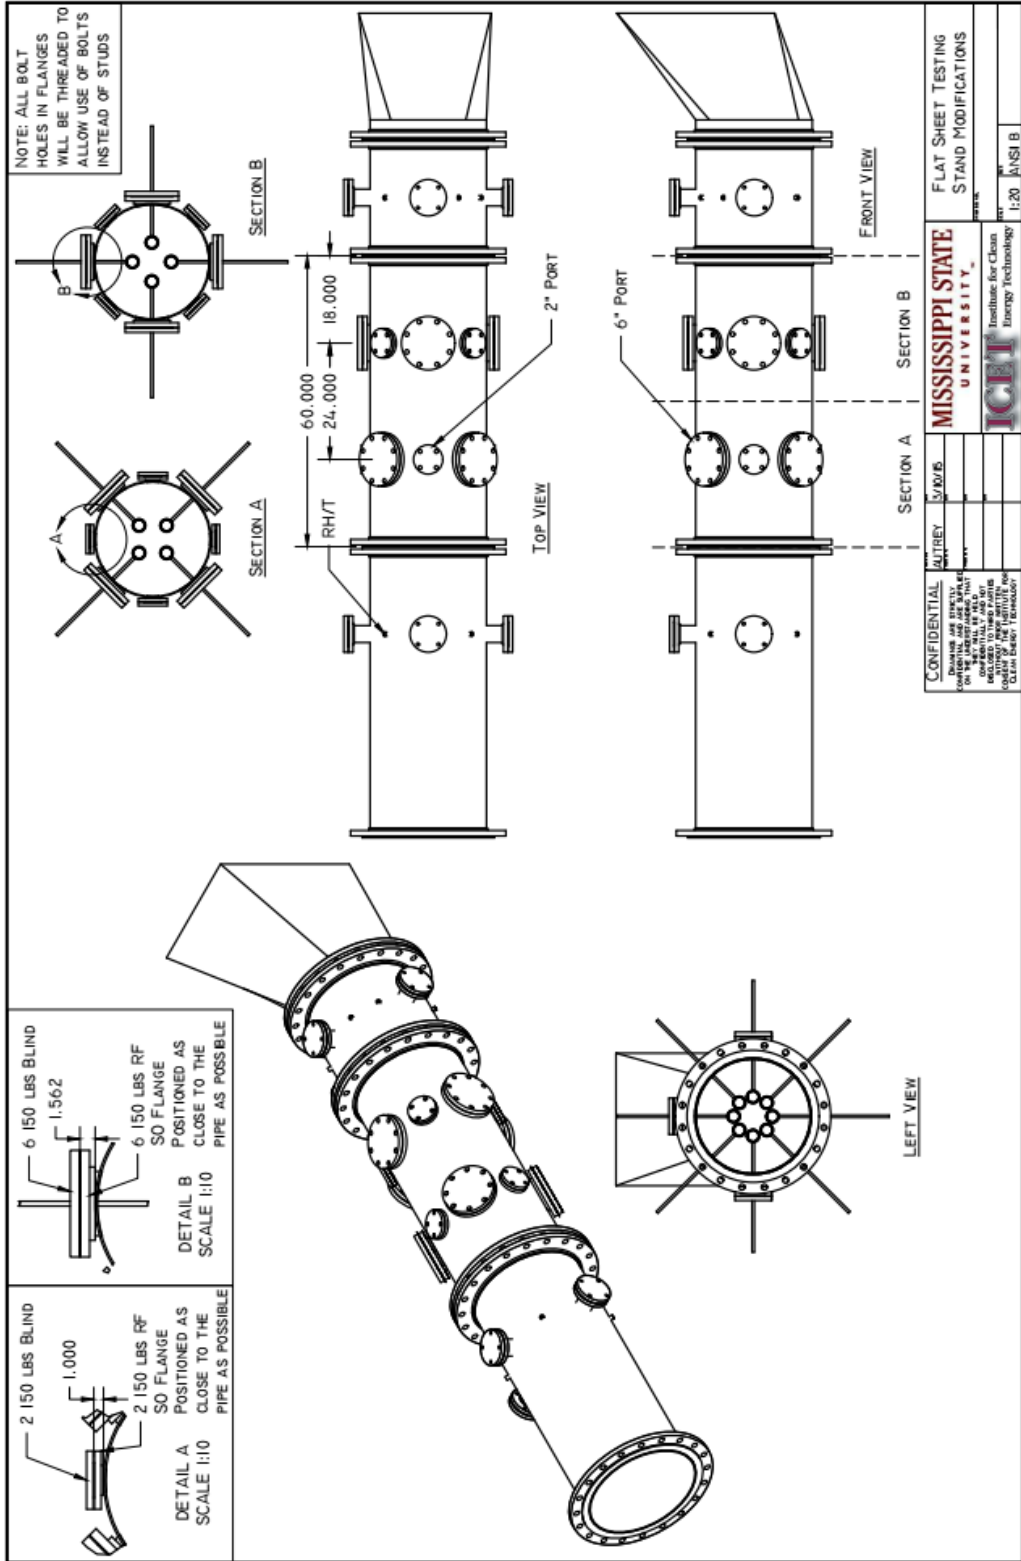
CAD drawing of modified test duct section with isokinetic samplers installed.
